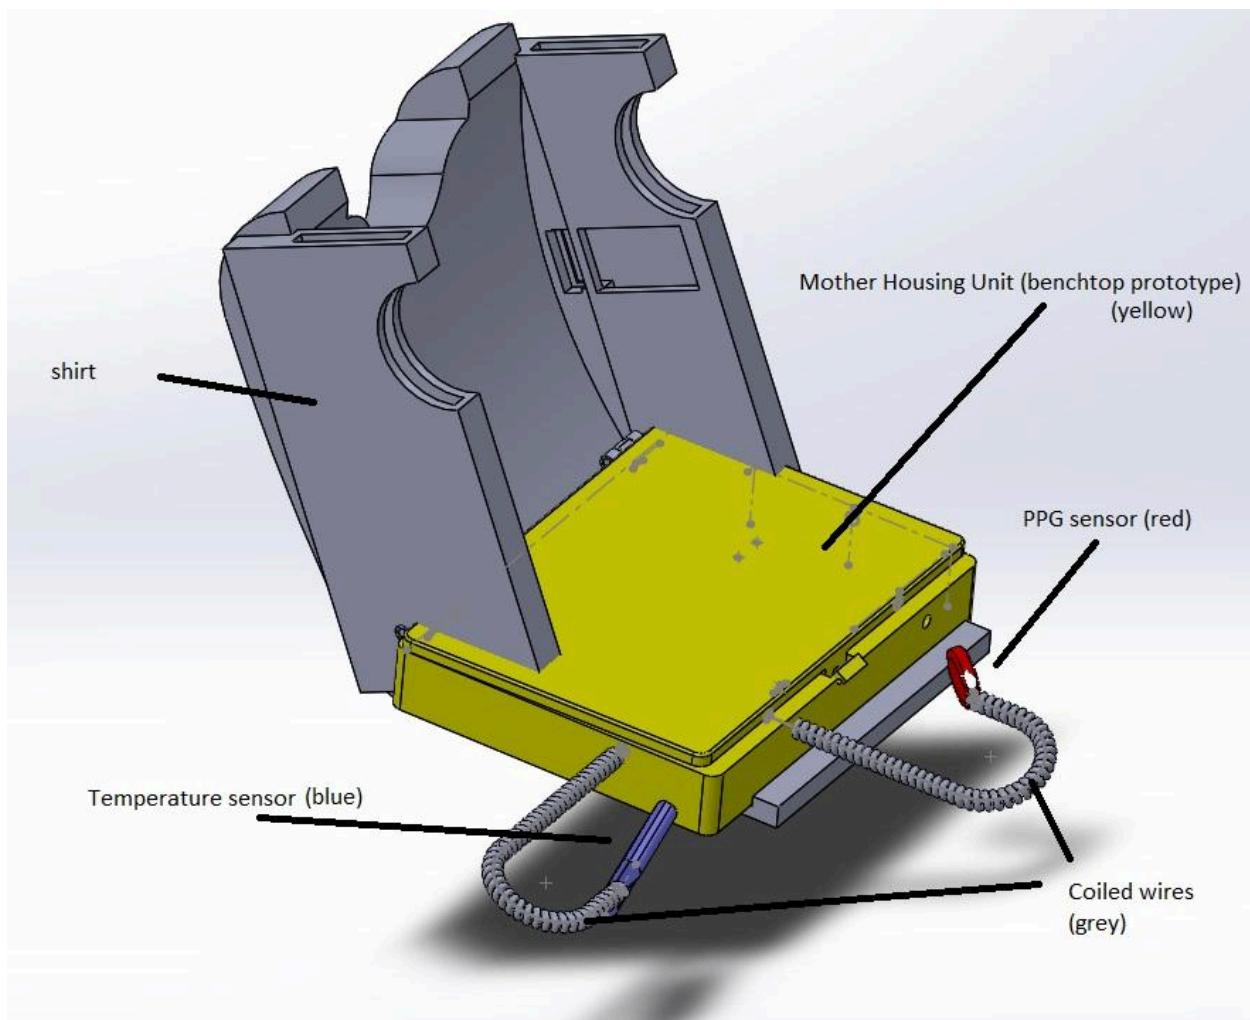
This assembly shows the model with a version of the Mother Housing using an Arduino UNO (Figs. 4,5). This is why we chose to create an alternate version of the Mother Housing in Fig. 18 and Part 4, using alternate dimensions in which we would use an Arduino Nano instead. This is because the benchtop prototype using an Arduino UNO that we initially modeled is too bulky and would be a very difficult prototype to build instructions for. We want to acknowledge that the currently dimensioned Mother Housing (Figs. 4 and 5) is too large to fit in the shirt, but also that this is currently the development we are able to realistically achieve in this class. Nonetheless, this also provided insight into how we will have to work around this issue to further prototype our model.
